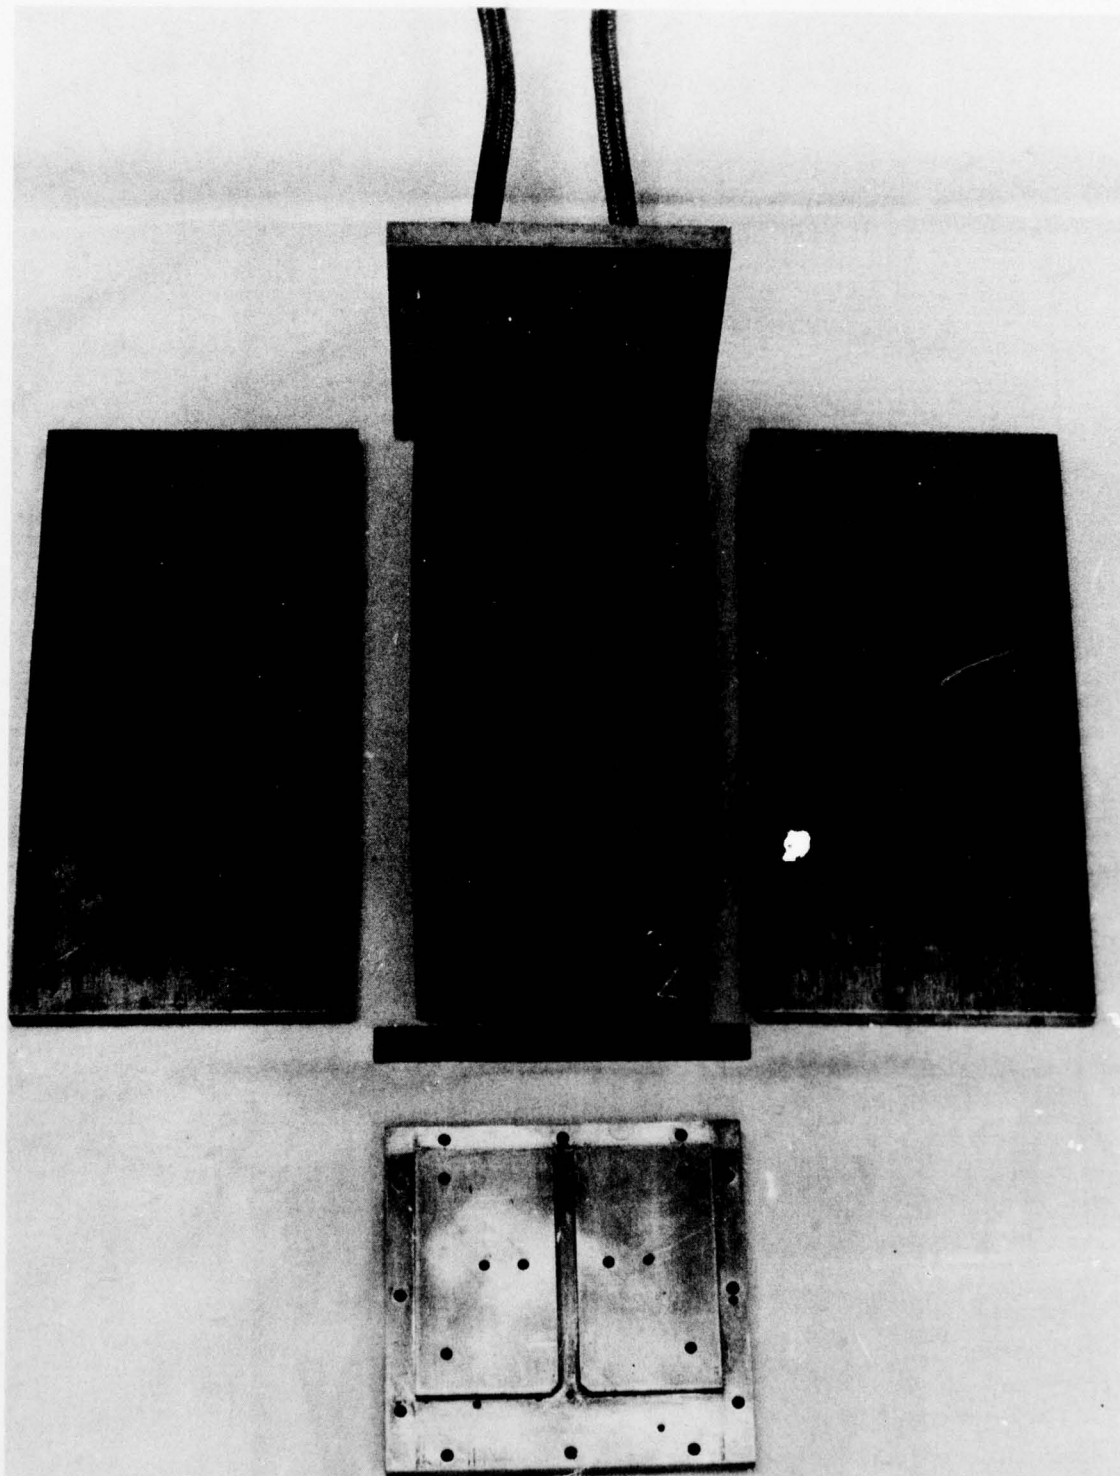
Unassembled Tooling Box With the Metal Forming Plates
